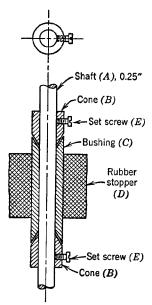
Gas-tight brass bushing. The gas-tight bushing for the shaft of the stirrer consists of three parts: two cones (B) which fit the shaft snugly and are attached to it by set screws (E); and a bushing (C) so cut that the cones fit into it at top and bottom. The two cones are placed on shaft (A) of the stirrer, above and below the bushing and attached to the shaft so that they fit snugly against the bushing. A gas-tight seal is obtained by placing a drop or two of heavy lubricating oil between each cone and the bushing. The over-all dimensions of the bushing are approximately 13 by 65 mm., and it is held in a rubber stopper (D).
